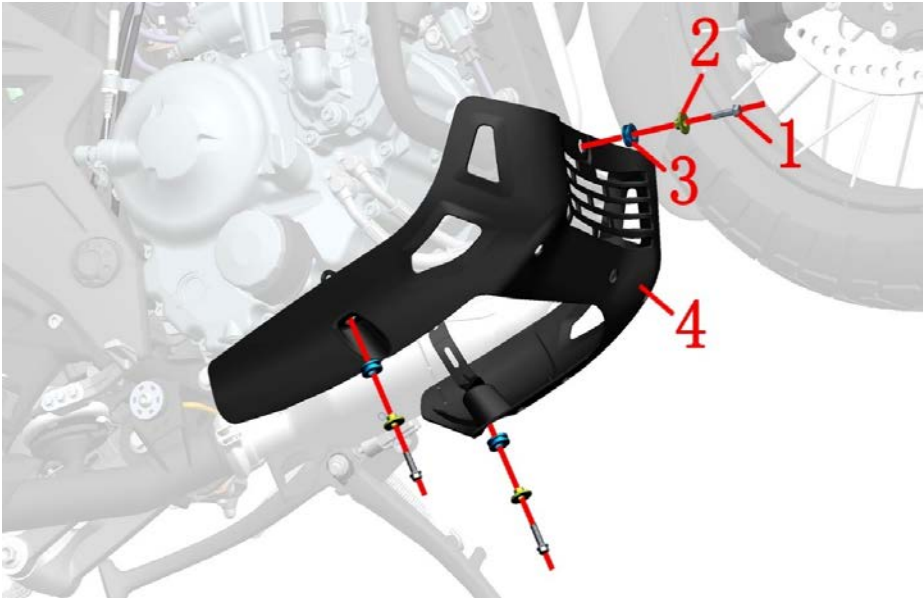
Lower Cowling Assembly		Lower Cowling Assembly 1	CHK
